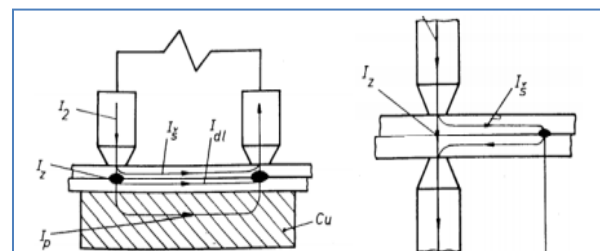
Turning current in spot welding: a) one-sided, b) two-sided [12]
